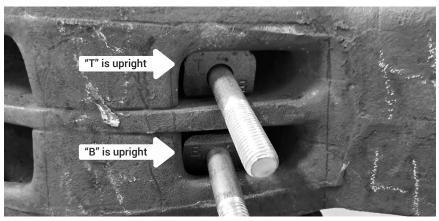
Bolts in position to accept mount head/arm assembly. The large white arrows point to the "T" and "B" correct orientation in the coupler.
